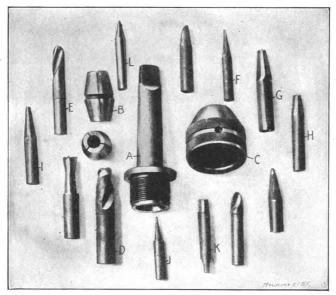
Chuck Parts and Cutters for the Die-sinking Machine
